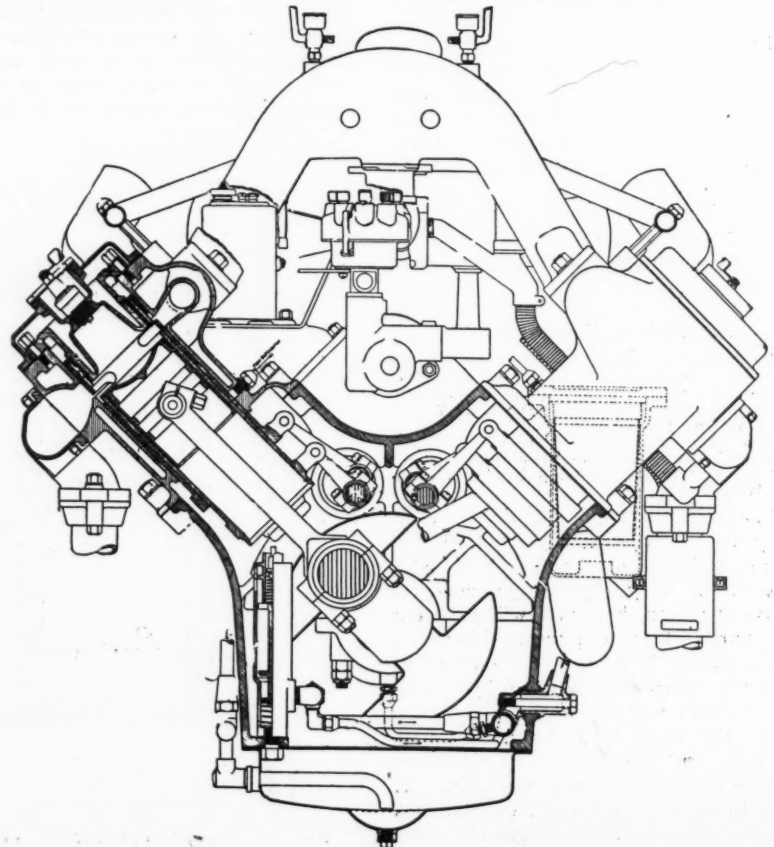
Sectional view of eight-cylinder Willys-Knight engine
